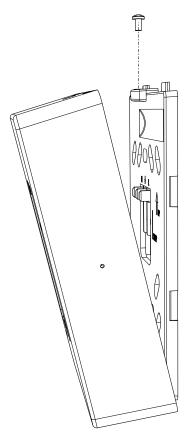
Mounting the Wireless Input/Output unit on the Mounting Plate
